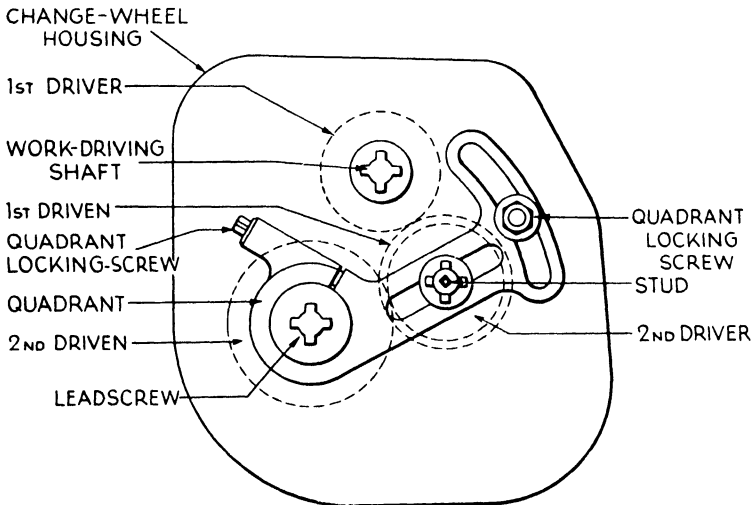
ASSEMBLY OF CHANGE WHEELS COMPRISING AN OPEN TRAIN
